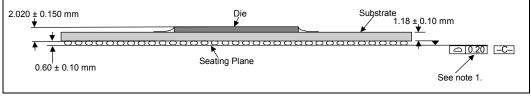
Intel® 82875P MCH Package Dimensions (Side View)
